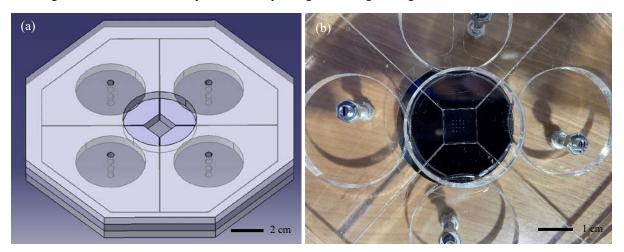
Fabricate a) CAD model for acrylic frame and b) printed master mold with silicon wafer substrate in the acrylic frame
